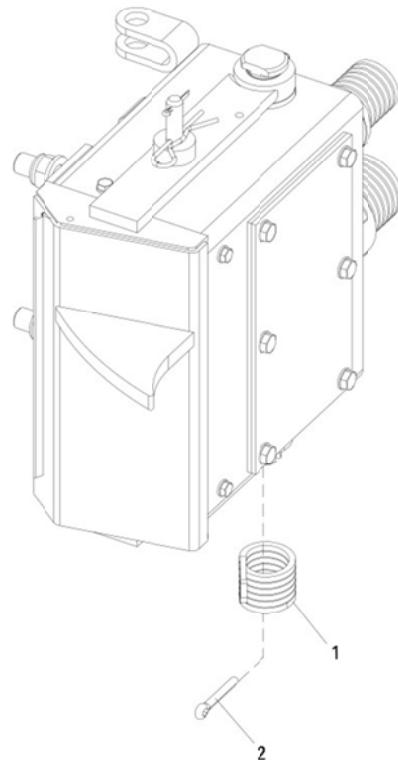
ELECTRICAL HEADS TORSION SPRING REPLACEMENT
